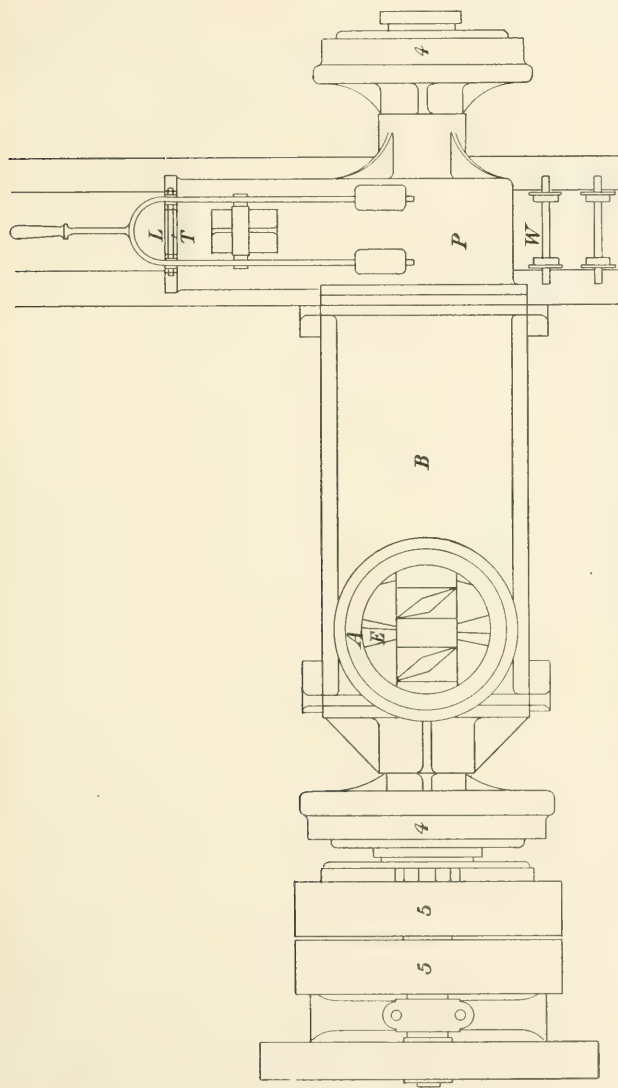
Hall-Bainbridge Peat Machine—Elevational Plan.
